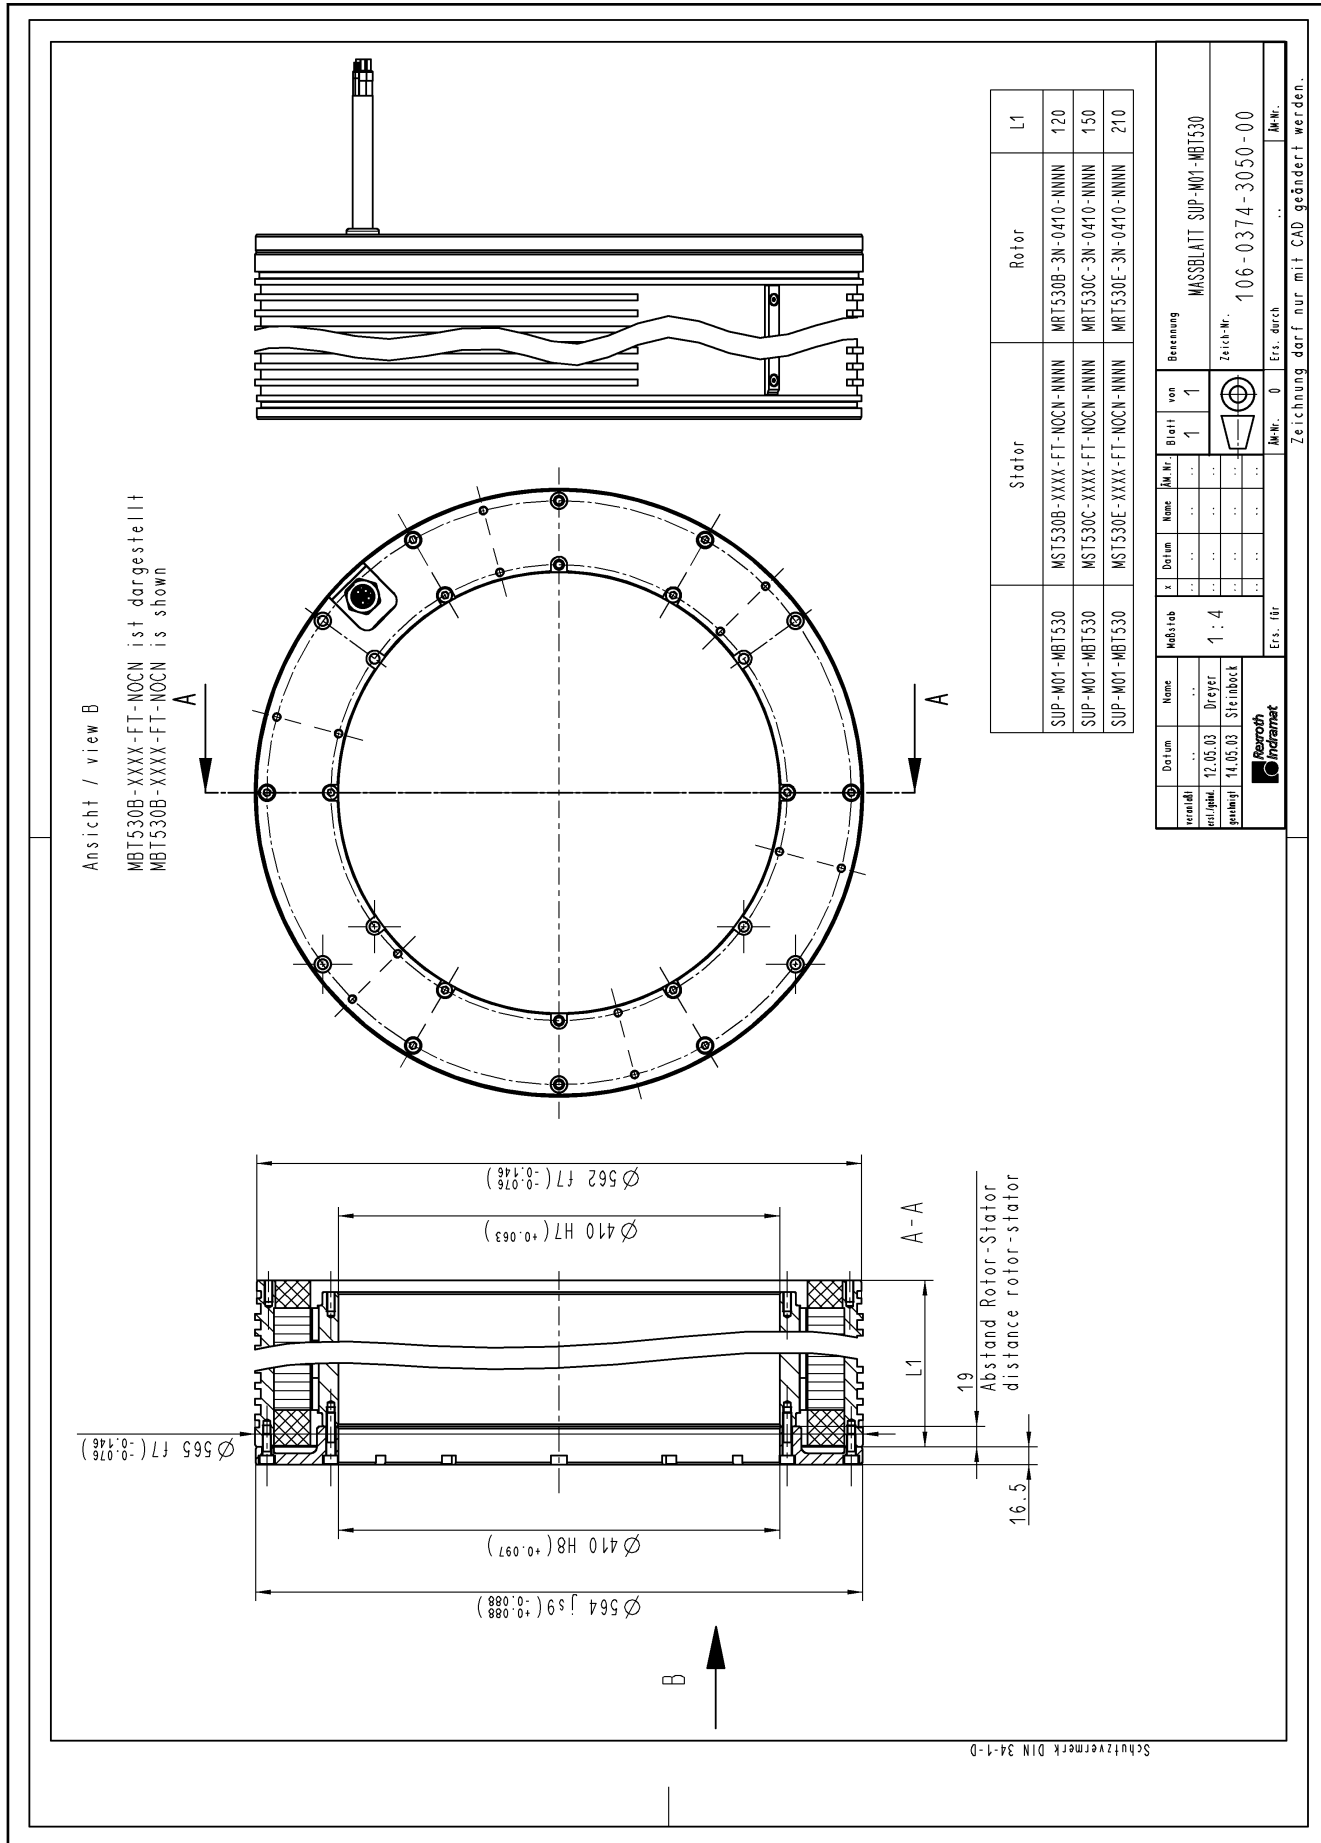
Dimension sheet of mounting ring in SUP-M01-MBT530
